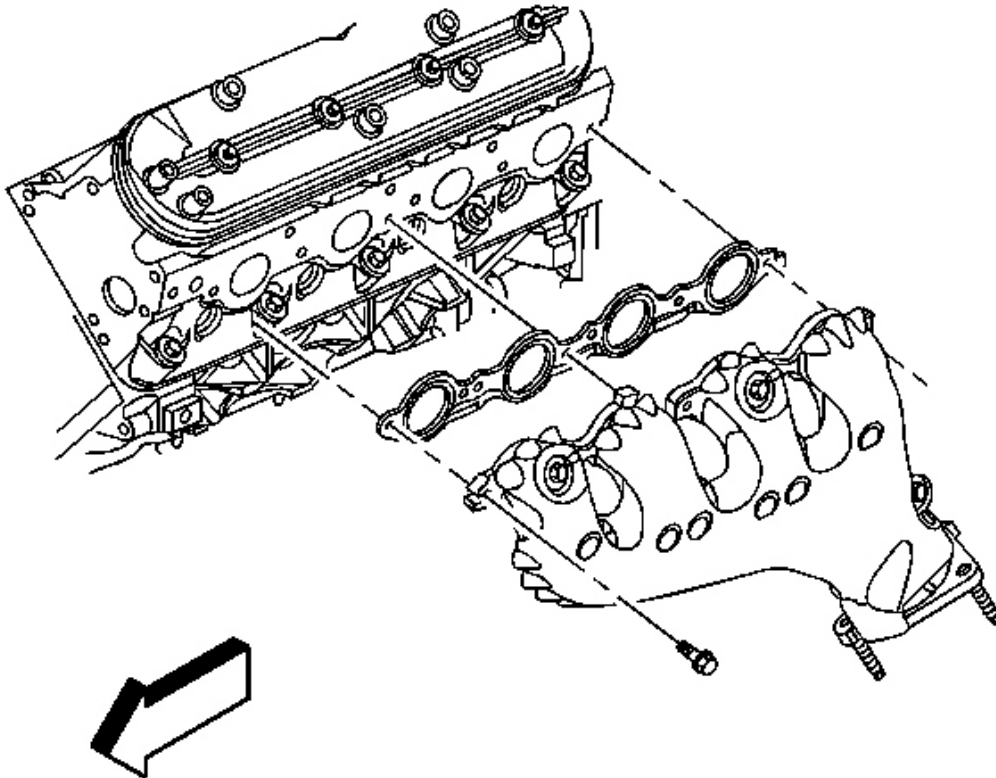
View Of Left Exhaust Manifold - 5.3L
